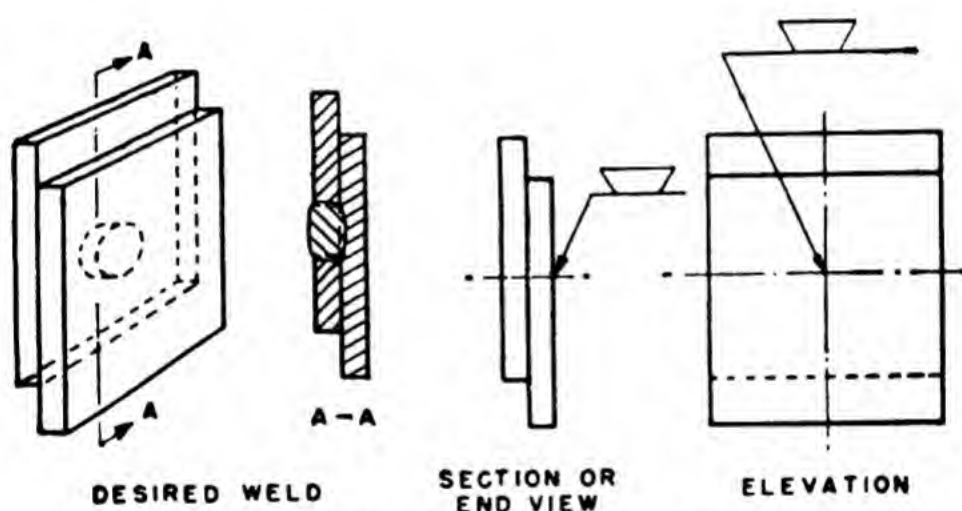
Use of other-side plug welding symbol.
